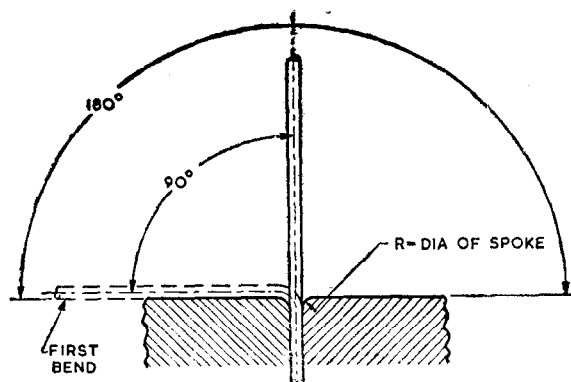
REVERSE BEND TEST FOR SPOKE WIRE
